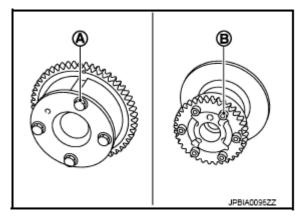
Removing Timing Chain (Secondary) Using Camshaft Sprockets
